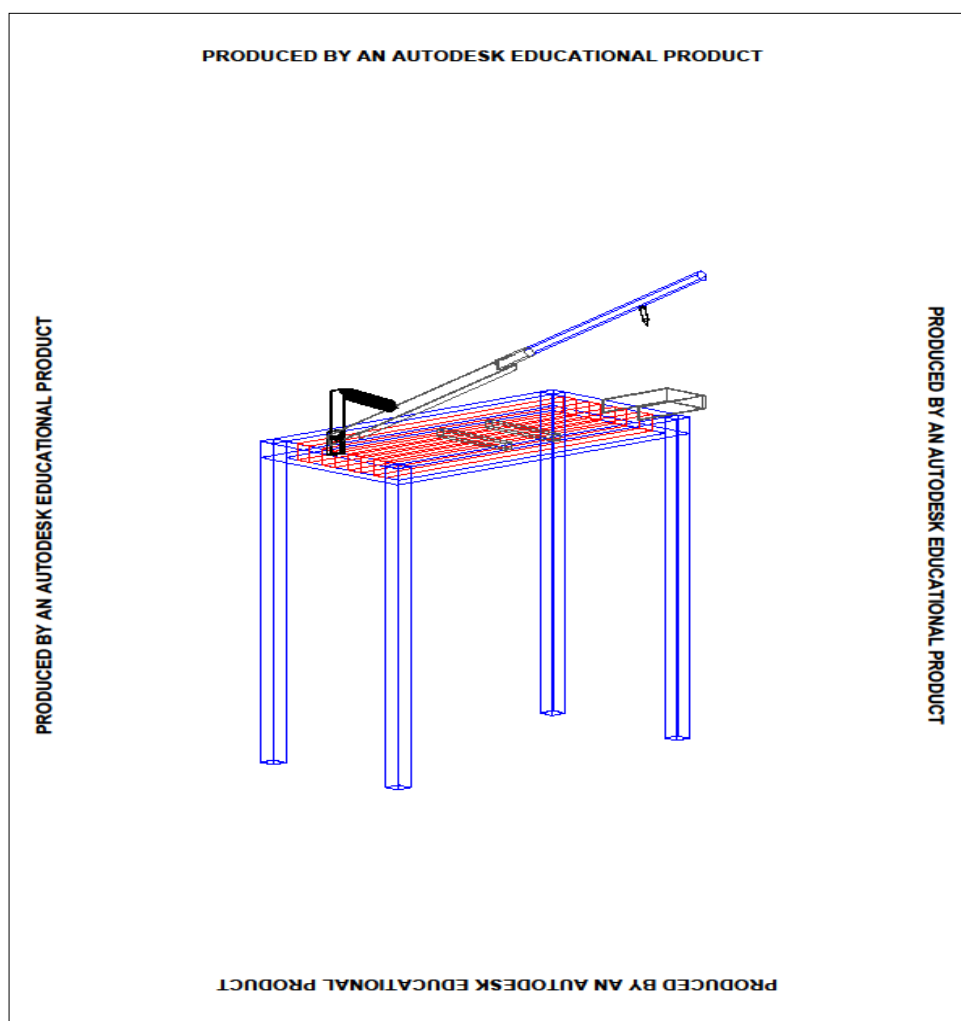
CAD drawing of the design of coconut punching cum splitting machine
